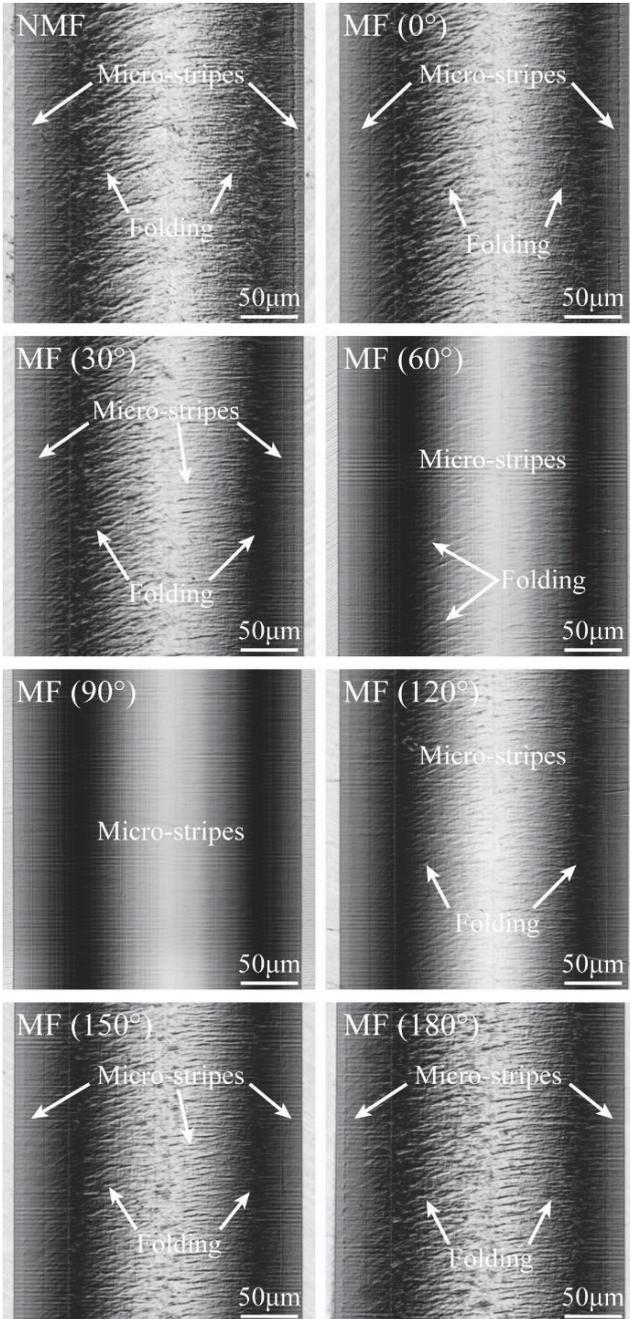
Optical morphology of machined surface under different magnetic field conditions.
